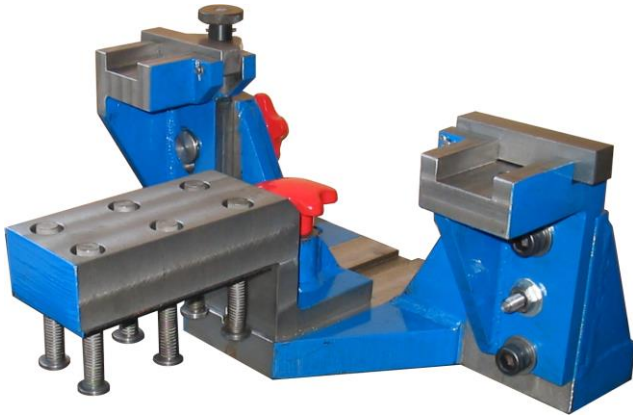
DAO 94-27 Shear arm alignment jig. Also used for checking the Shear blade fixture.
